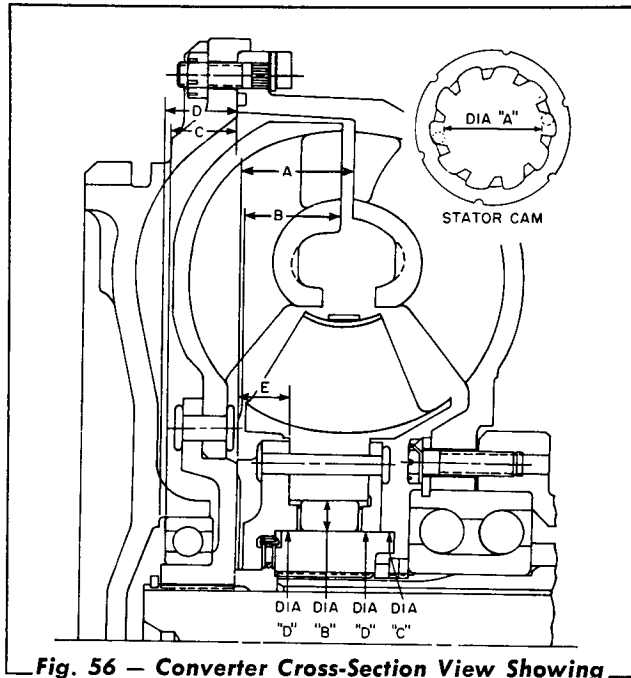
Converter Cross-Section View Showing Wear Limits
